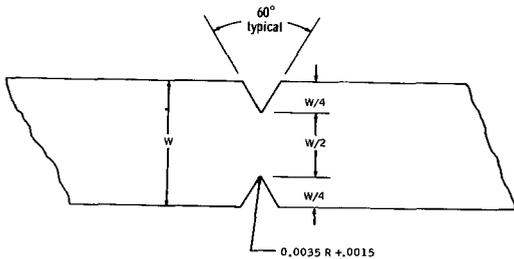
Notched specimen. Notches opposite within 0.001 inch.
